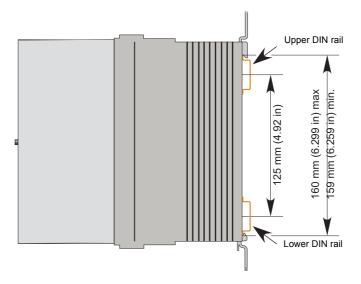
DIN rail mounting details for 80A, 100A and 125A units
